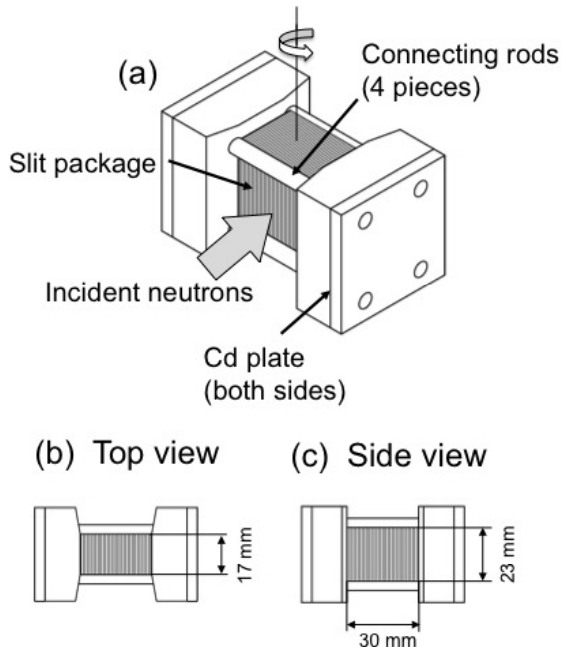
Schematic drawings of a slit package; (a) diagrammatic perspective view, (b) top view and (c) side view.
